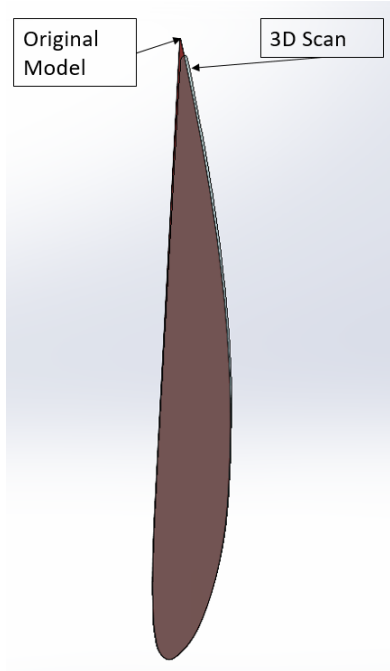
Reference SolidWorks Model Superimposed on 3D Scan of 3D Printed Part (Top-View)
